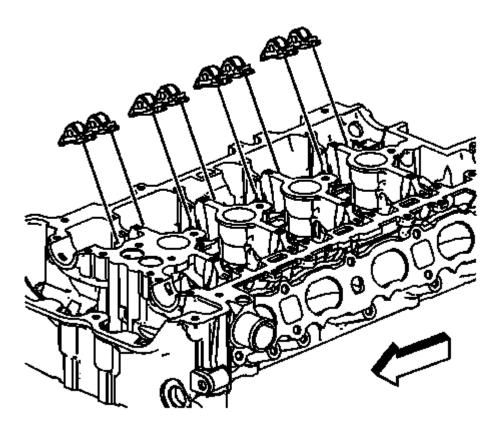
Valve Tips Courtesy of GENERAL MOTORS COMPANY
